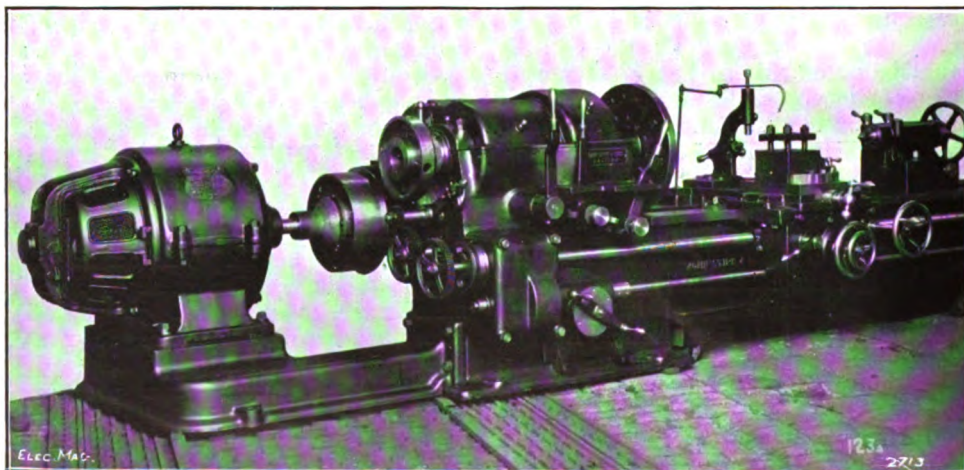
ELECTRICALLY-DRIVEN HIGH-SPEED LATHE. JOHN STIRK & SONS, LTD.
